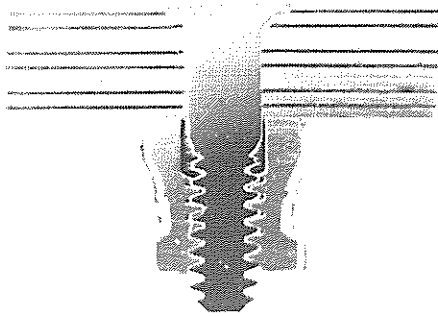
Cross-section of ARALL counter-sunk Hi-lok joint
